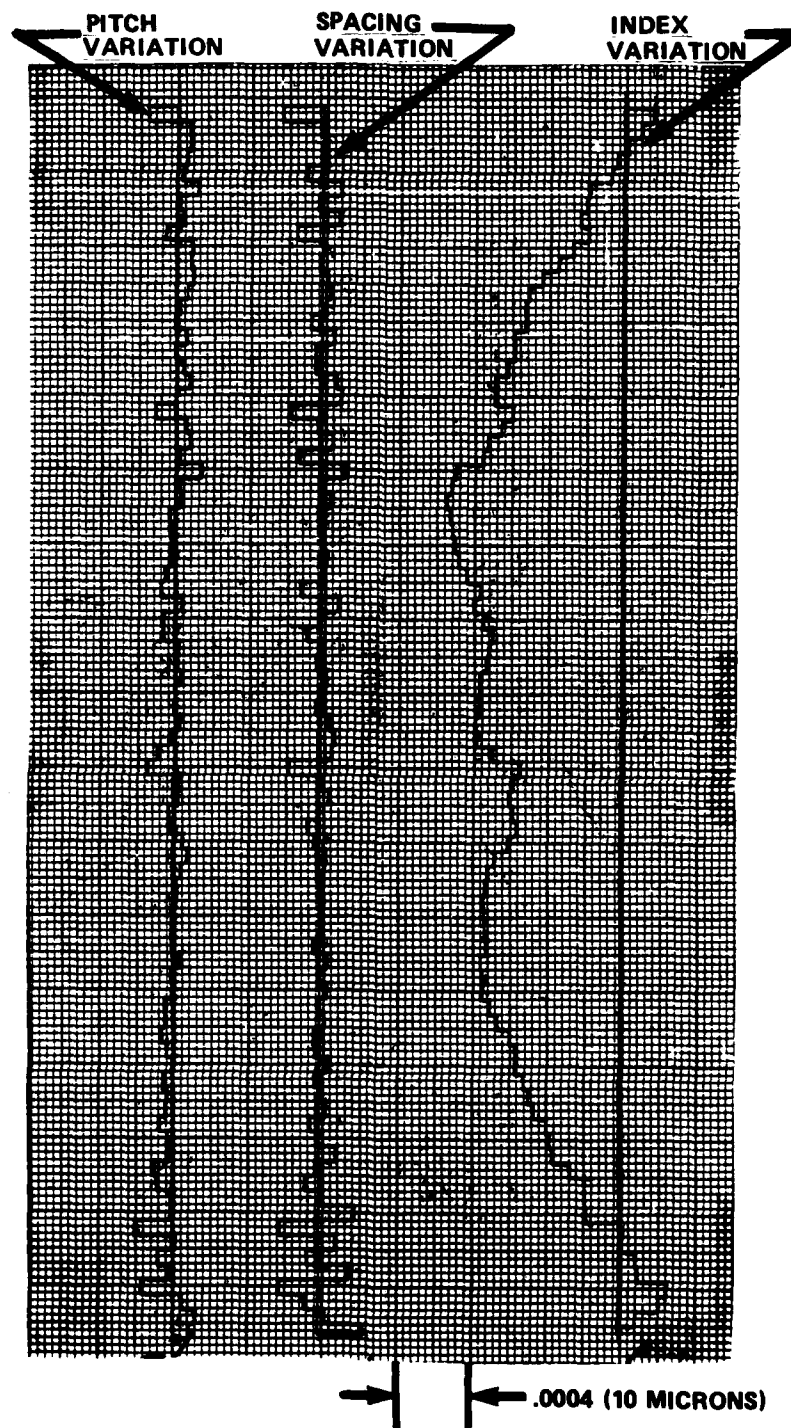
HCR Planet Gear Pitch, Spacing and Index (Coast Side/Sun Gear Mesh).
